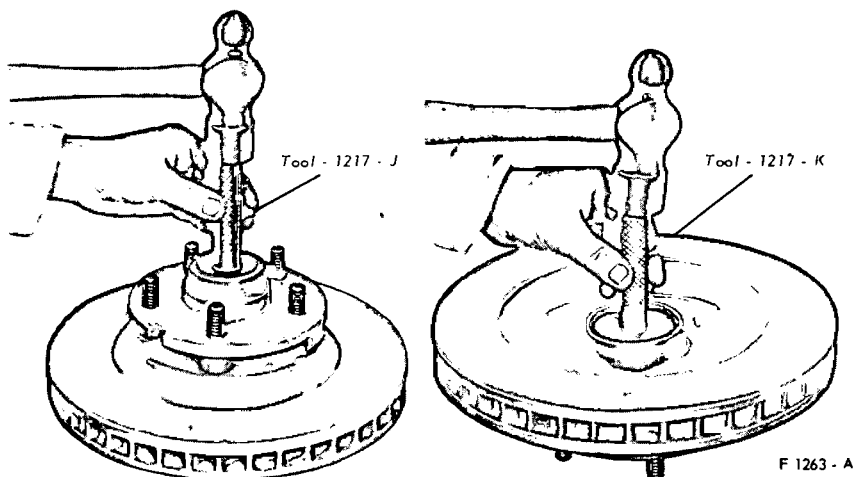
Installing Front Wheel Bearing Cup—Disc Type
